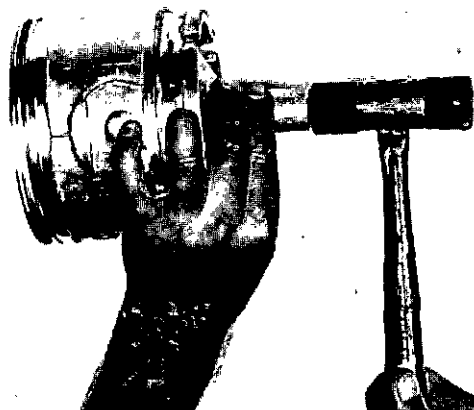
, (T465060). Drive the oil seal plate from the bearing housing
